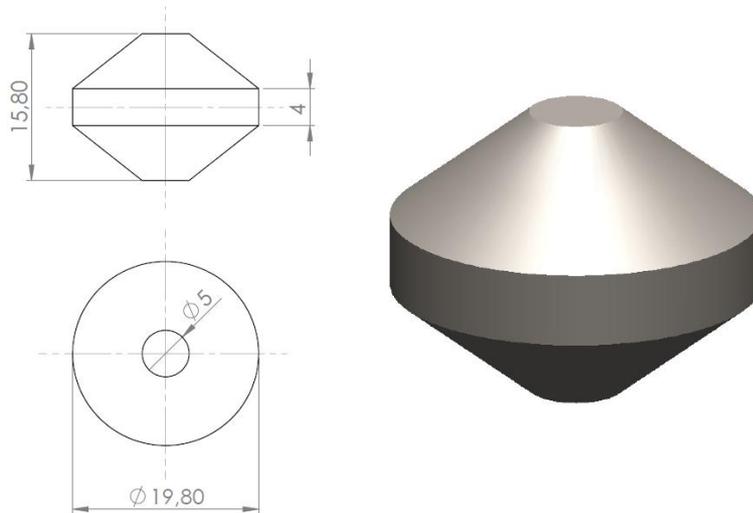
Geometry of the double-cone model specimen (in millimeters).
